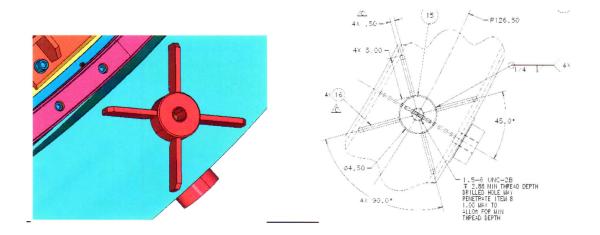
The configuration and dimension of the lifting lug weldment.
